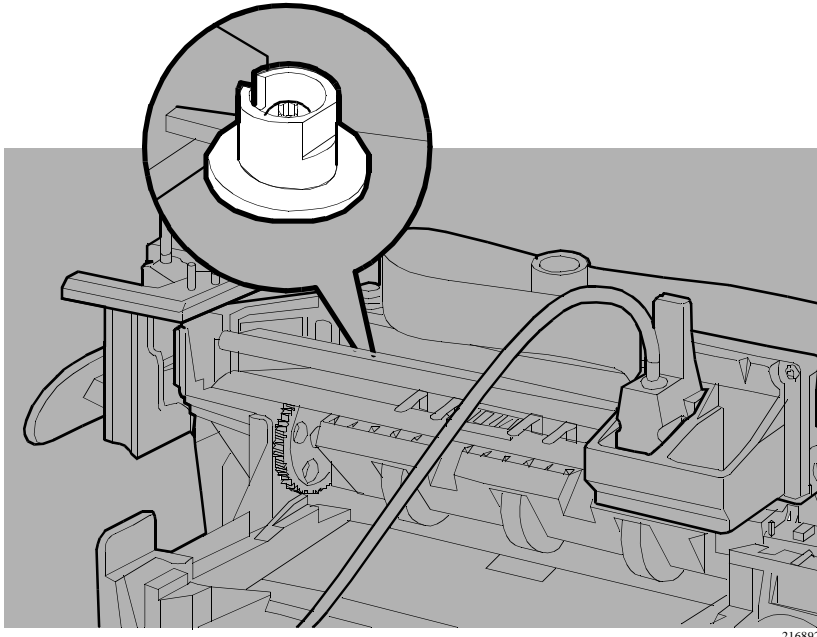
Adjusting the Pen-to-Pivot Spacing with the Pivot Adjuster
